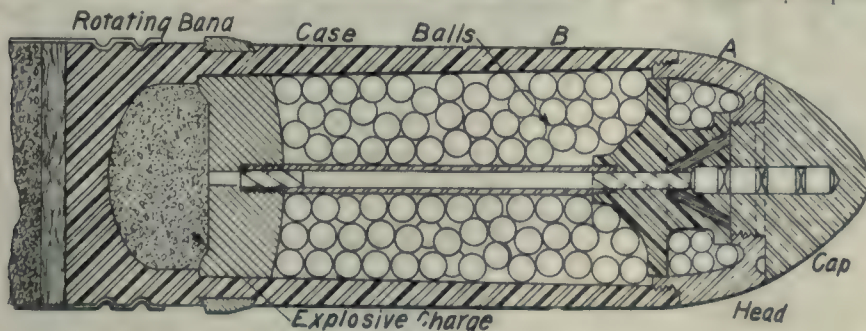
SECTION THROUGH SHRAPNEL SHELL.
